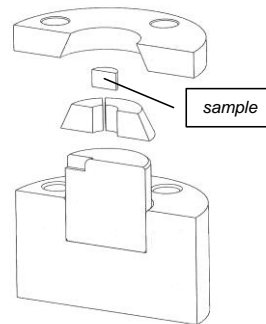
Exploded view of the sample holder (cross section) allowing for orthogonal isotropic loading
